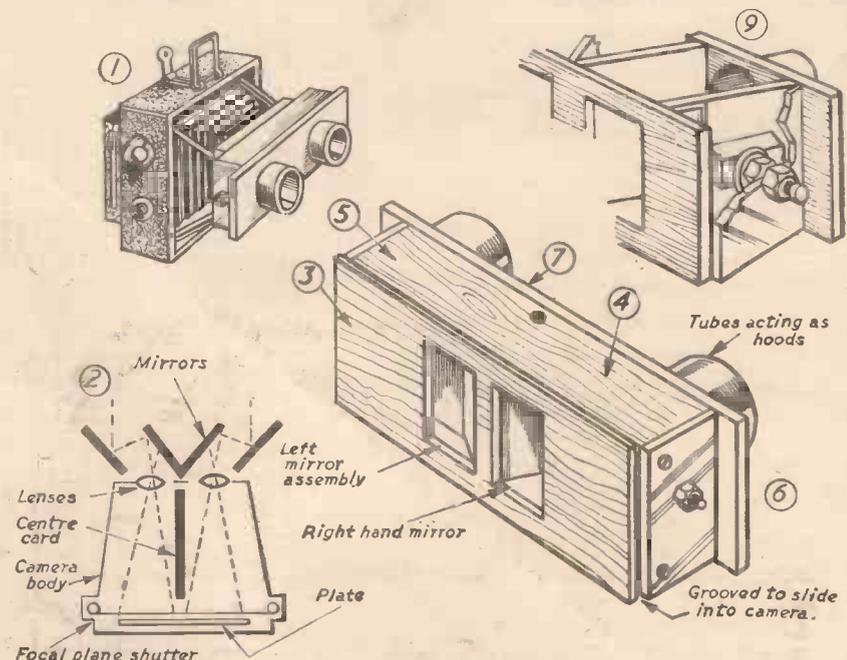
The completed adaptor fitted to a camera with focal-plane shutter, and details of mirror assembly and adjustable end plate.
